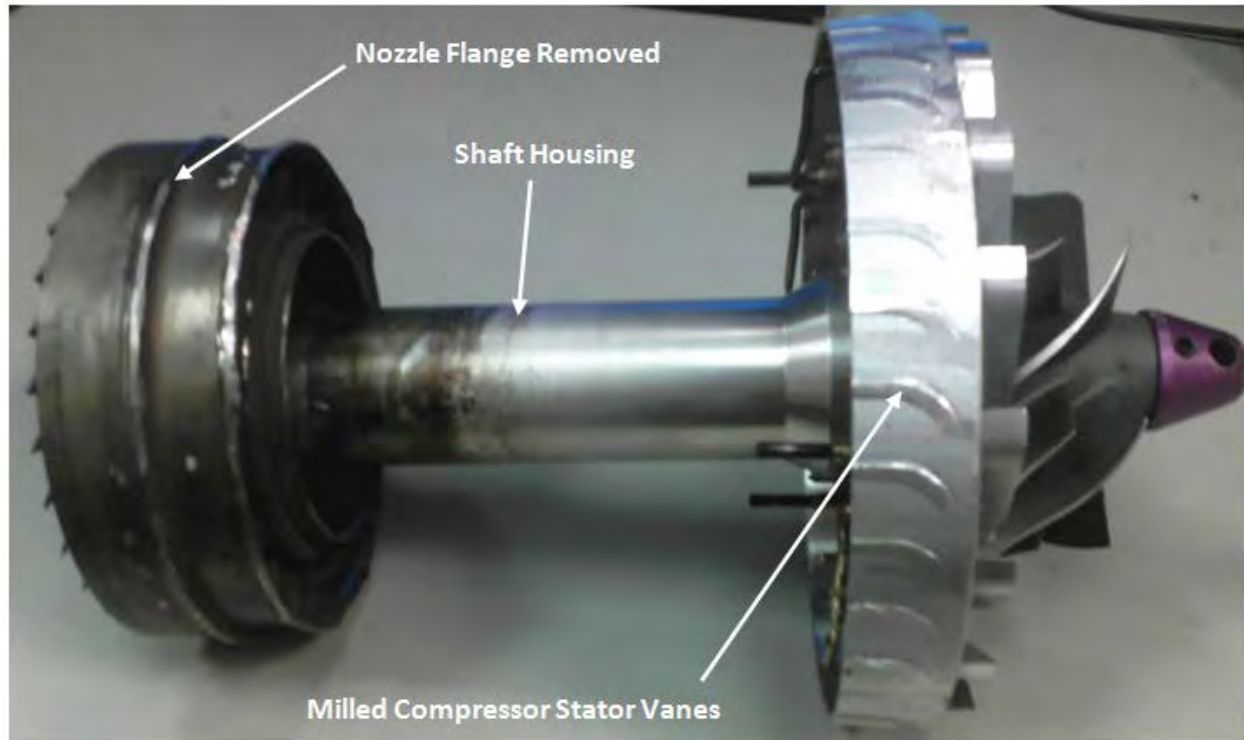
JetCat P-200 with the compressor stator vanes milled flush with the flow conditioner and the combustor and nozzle flange removed
